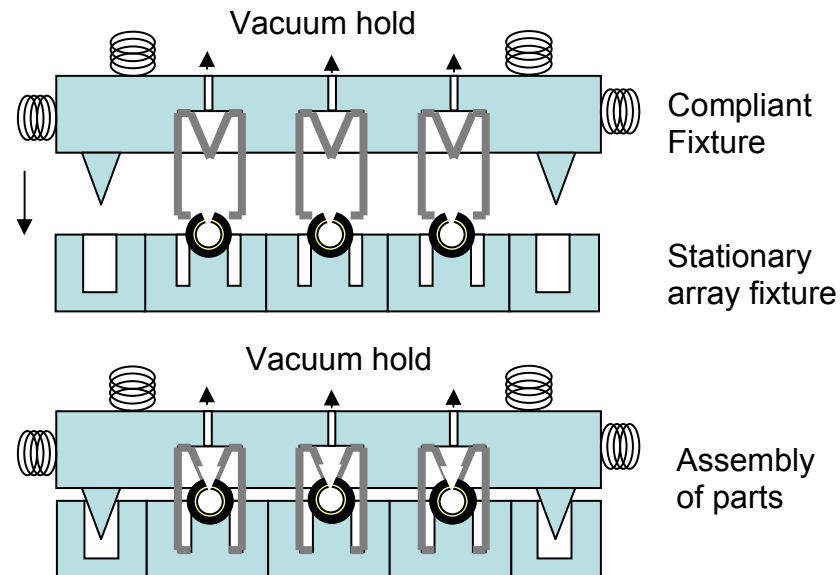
Fixture for array assembly of cone to capsule
